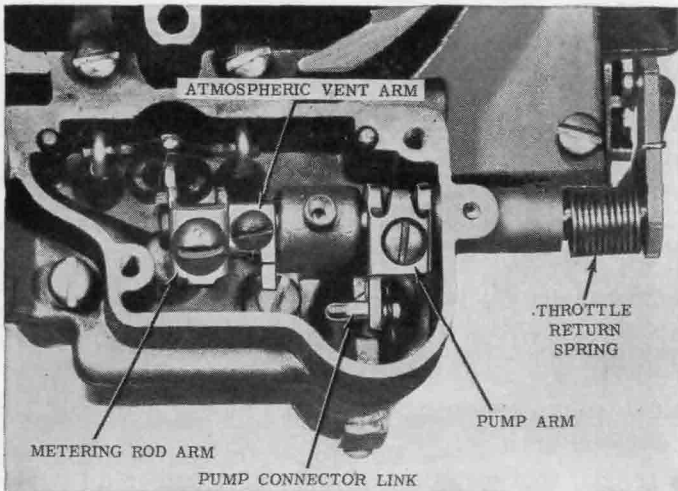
Various parts located in the metering-rod housing. (Oldsmobile Division of General Motors Corporation)
